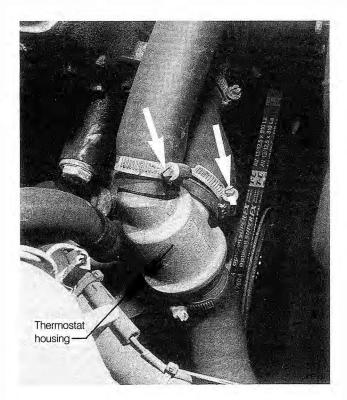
Location of hose clamps (arrows) and thermostat housing on 4-cylinder engine.
